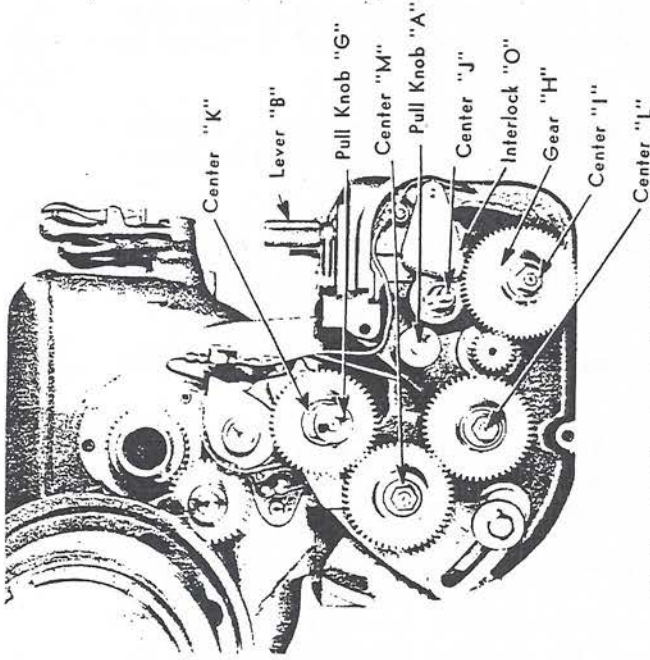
End Gearing for Lathe Not Equipped With Reverse To Leadscrew
